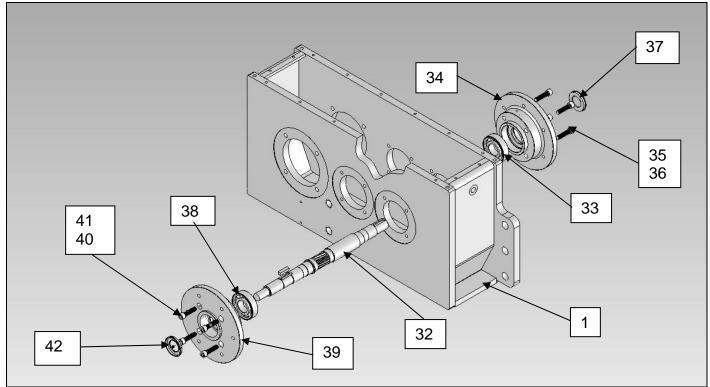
, Gearbox Assembly, (Motor Pinion & Shaft)
